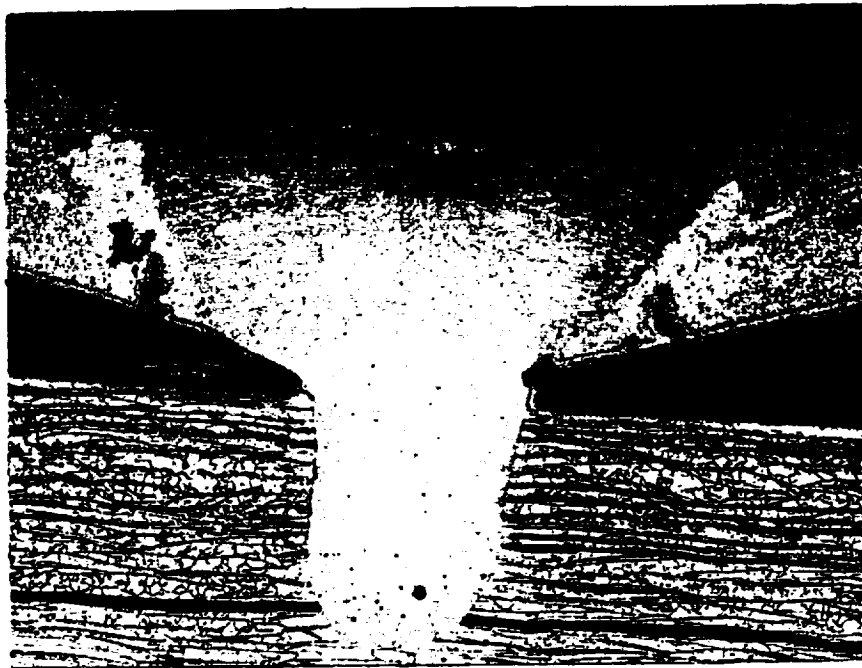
Laser Welded/Inflation Formed Inconel 625
